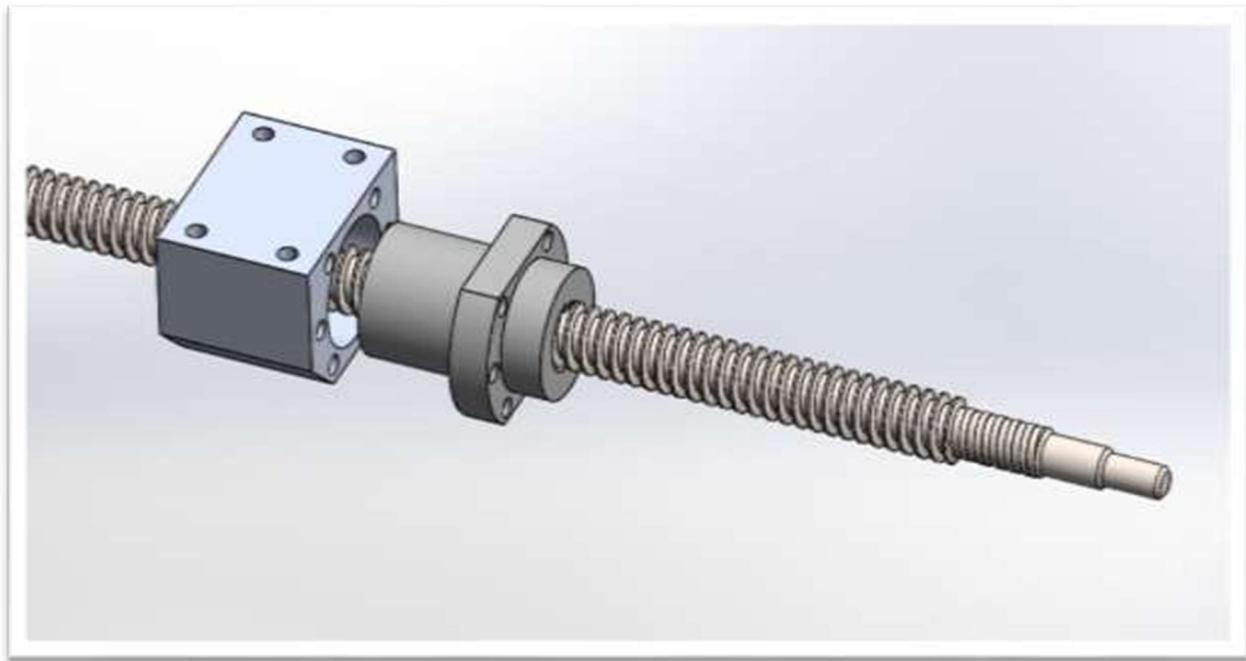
install lead Screw Nut Seat Bracket Holder Mount Housing in lead screw
